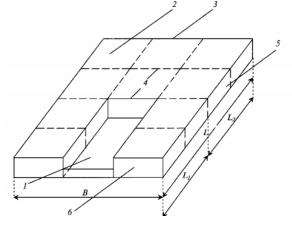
Plan of upper hull structure (example); B — upper hull breadth; L — upper hull length;  $L_1, L_2$  lengthwise span between stability column axes; 1,2 — deck; 3,6 — transom; 4 — bulkheads; 5 — side
